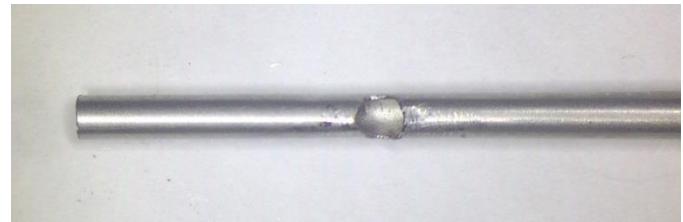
End of the joystick electrode tube, showing a completed side hole. Note the absence of sharp burrs on the edge of the hole.
